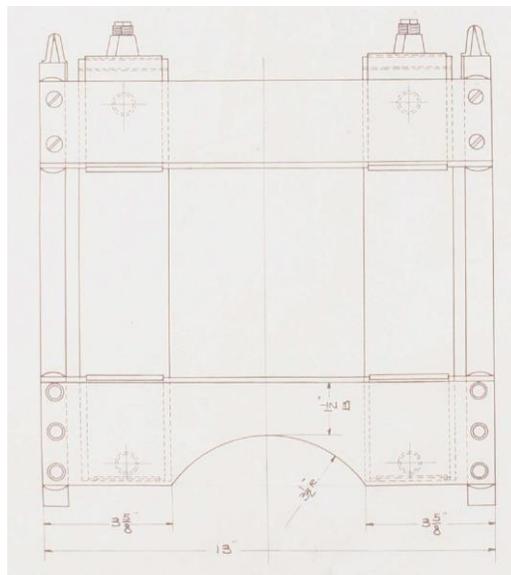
Drawing 3154, a 2 Cell Containing Tray
